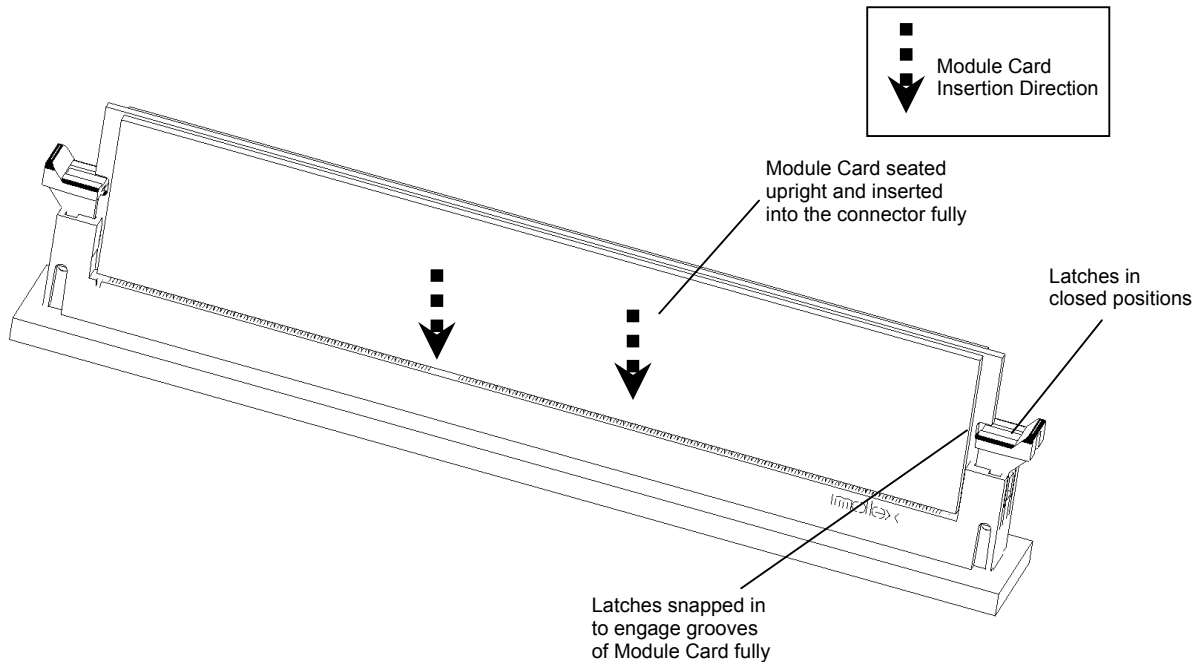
Correct Application of the DDR3 DIMM 240ckts Vertical Press Fit Connector, PCB and Module Card Assembly
